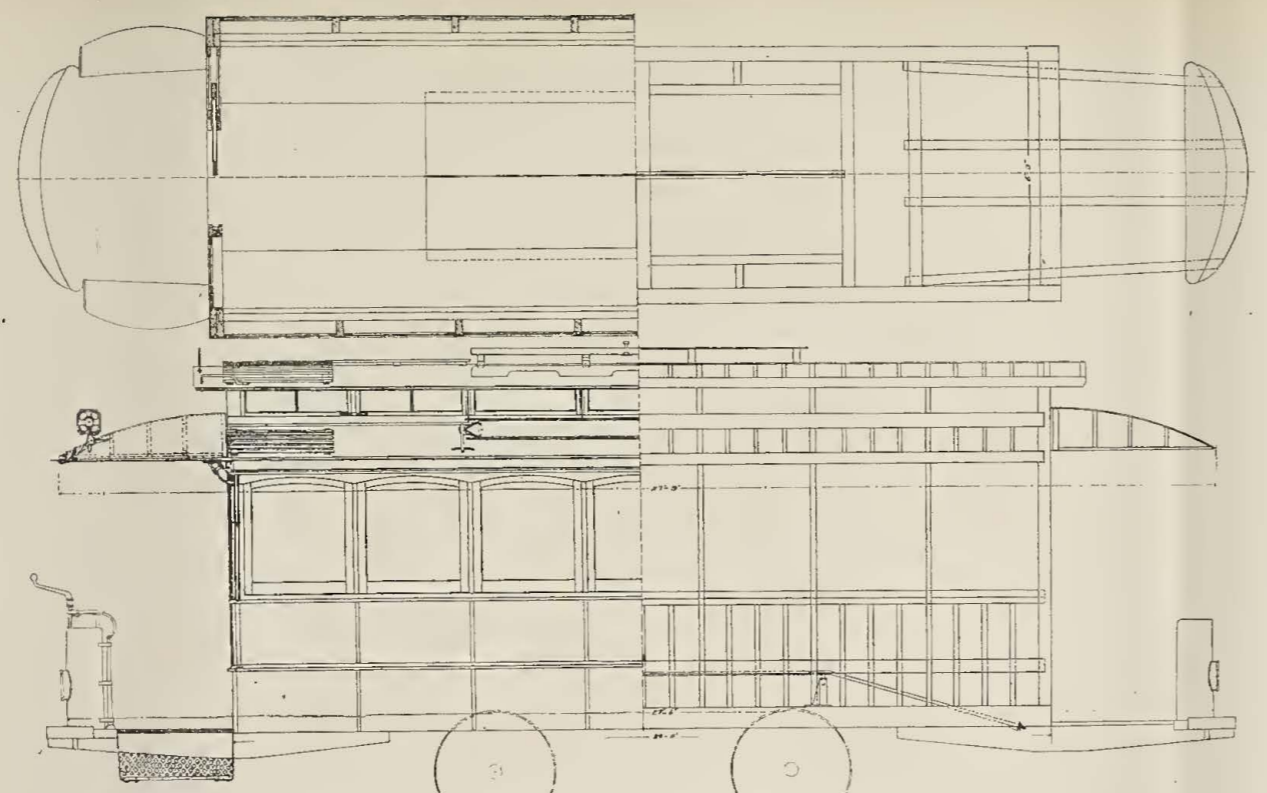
Plan and Half-Side Elevation and Section of 20-ft. Box Car.
